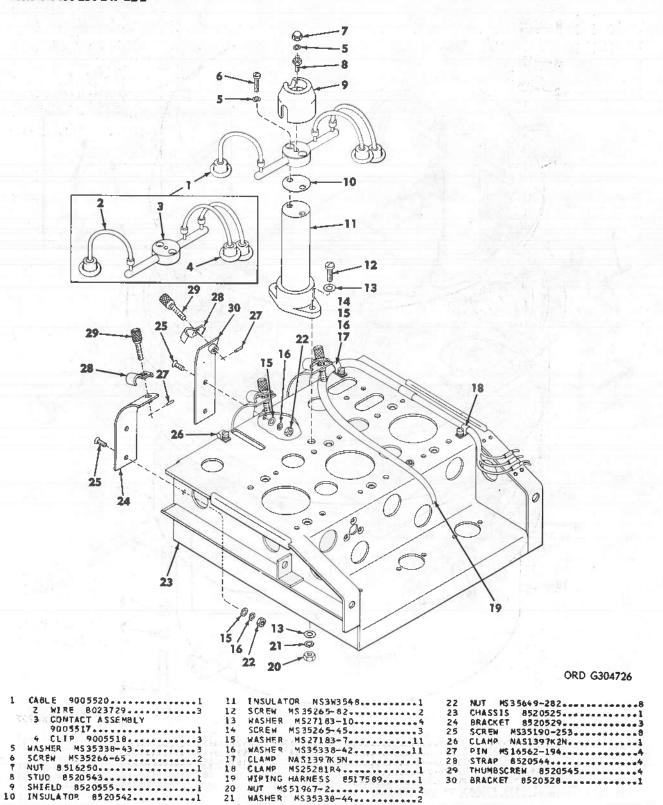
POWER SUPPLY SUBASSEMBLY /8520524/-PARTIAL EXPLODED VIEW
